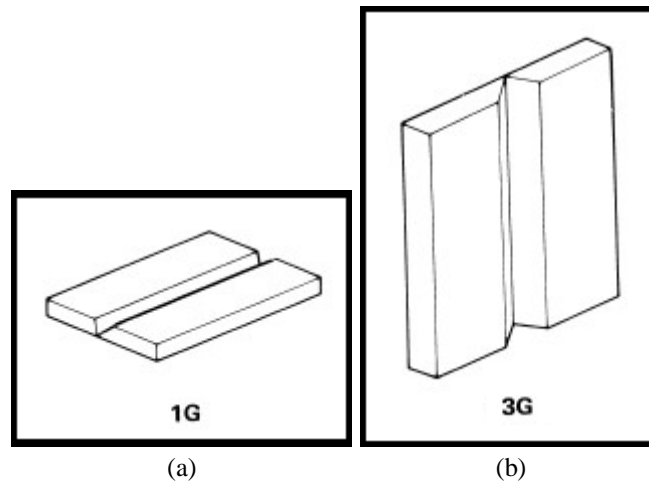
a) The 1G position of a grooved plate to be welded. The plate is both placed and welded horizontally; b) The 3G position of a grooved plate that will be welded. The plate is secured vertically and the weld will be made down the groove vertically, either from top to bottom or bottom to top.¹³
